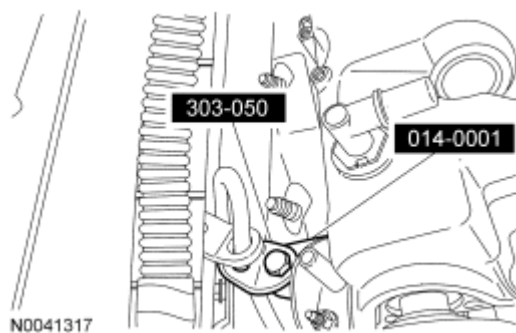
Identifying Lower Half Of Lifting Hook
